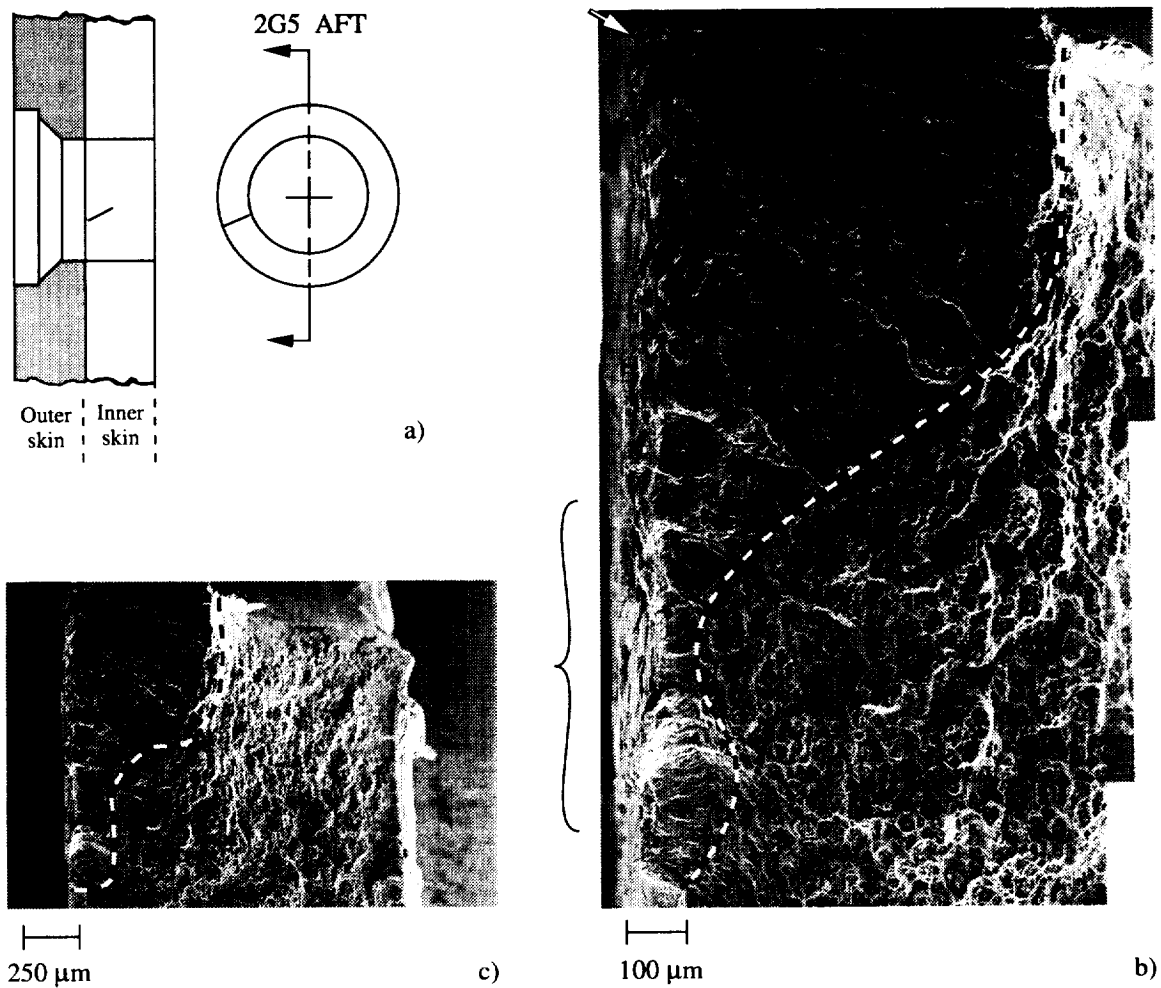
a) The schematic shows the rivet hole 2G5 configuration and the location of the inner skin fatigue crack oriented in the aft direction and slightly below the 9 o'clock position. b) The SEM micrograph shows the fatigue crack fracture surface that extends along the faying surface (left of micrograph). The rivet hole is located at the top of the micrograph. The dashed line marks the fatigue crack front. The crack front geometry suggests that a number of surface fatigue cracks initiated along the faying surface and have coalesced to form a nonsemicircular shaped fatigue crack front. Possible crack initiation sites are marked by an arrow at the corner and a bracket along the faying surface. c) The SEM micrograph shows the relationship of the fatigue crack surface with the rivet hole (top) and inboard skin surface. The dashed line marks the fatigue crack front.
